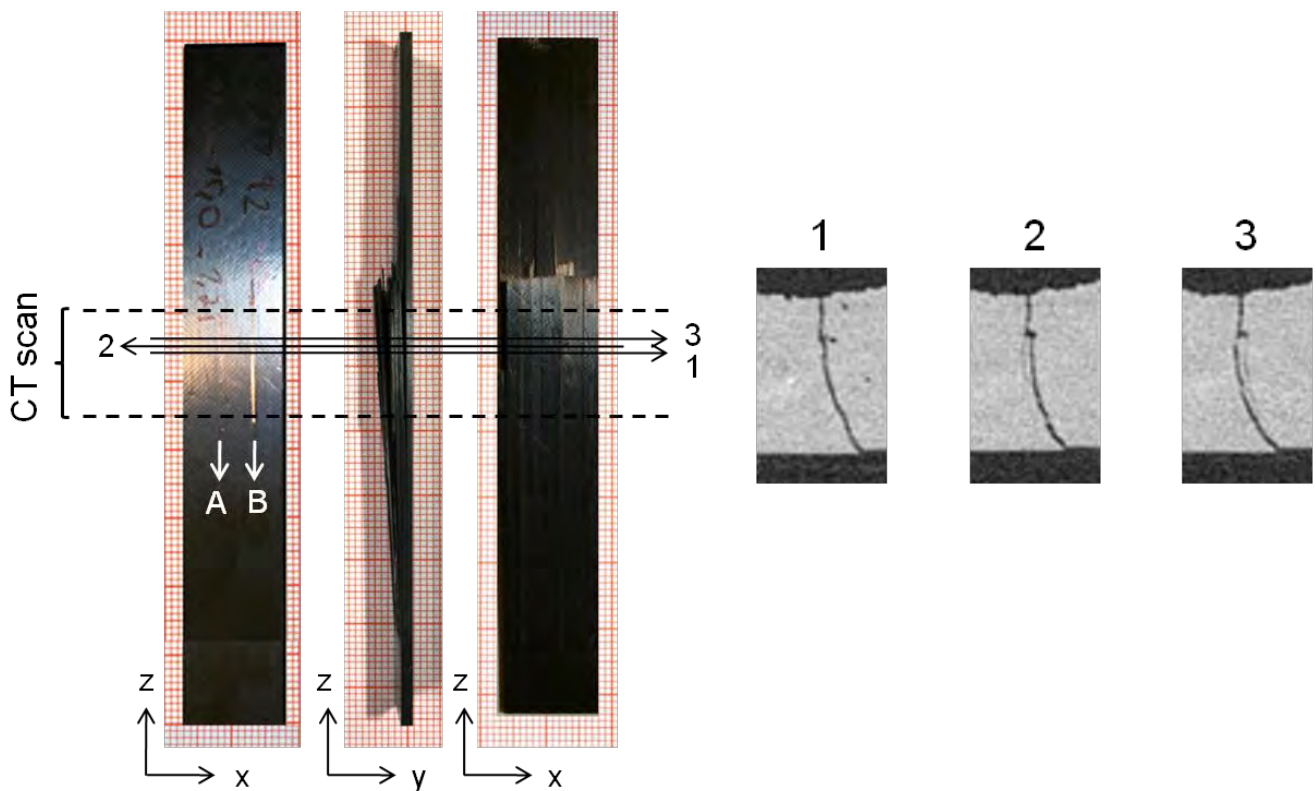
Macroscopic view of a sample after four point bending showing the rupture of the fibres on the tension side and a small fracture on the compression side (crack B). Numbers "1", "2" and "3" mark the position of the CT slices on the right side.
